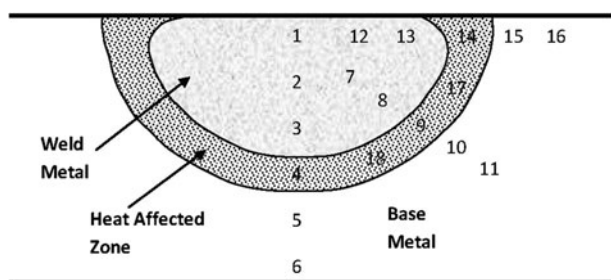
Microhardness maps of 5083 weld beads.
